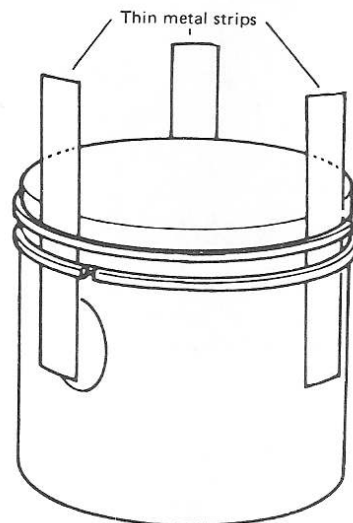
A.6 Insert the metal strips under the rings and ease the rings off with a peeling motion (Sec 9)
